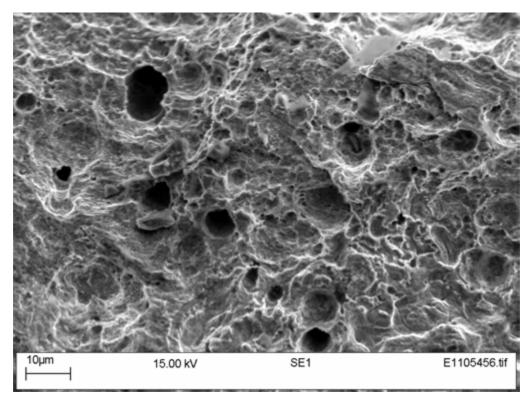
SEM fractograph, showing detail of figure 39 and fractography consistent with ductile microvoid coalescence type fracture.
